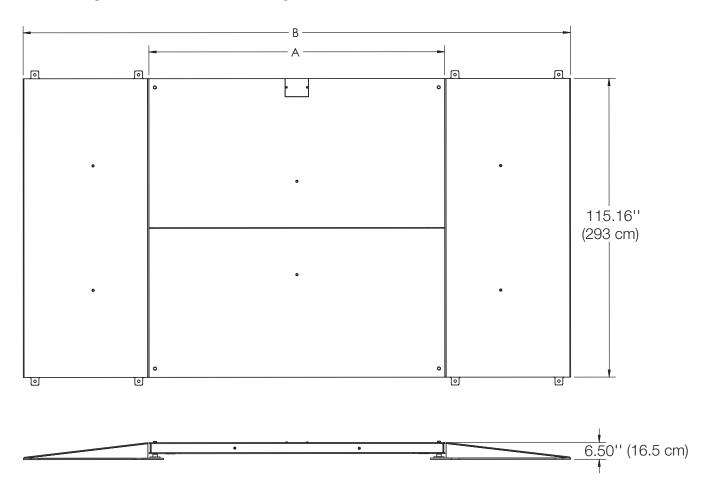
RoughDeck AX-1 Scale with Ramps Dimensions Drawing
